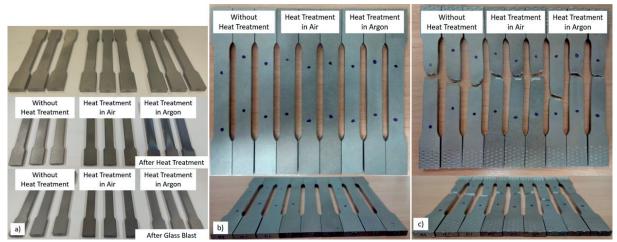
Ti-6Al-4V tensile test samples a) as manufactured, after the heat treatment, after the heat treatment and glass blasted, b) before the tensile test, c) after the tensile test
